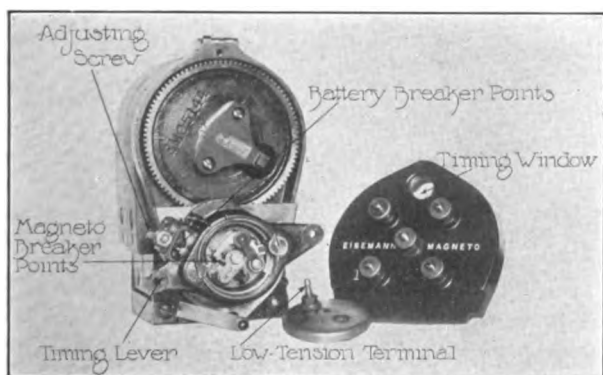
Eisemann Type E M Magneto with Distributor and Circuit Breaker Covers Removed.
